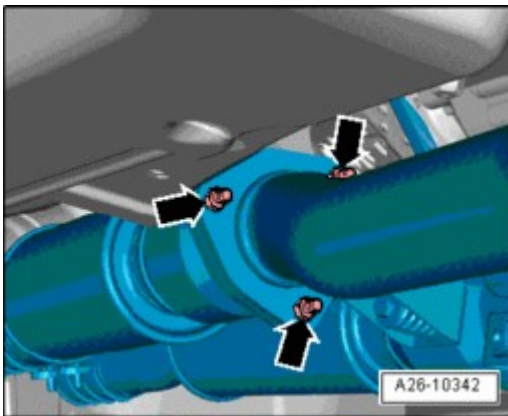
Removing Nuts And Right Front Muffler From Y-Pipe
